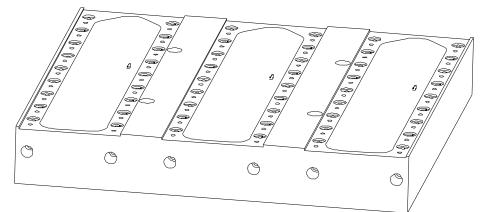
Teflon slide holder. The slide holder is mounted on the X axis positioner.
